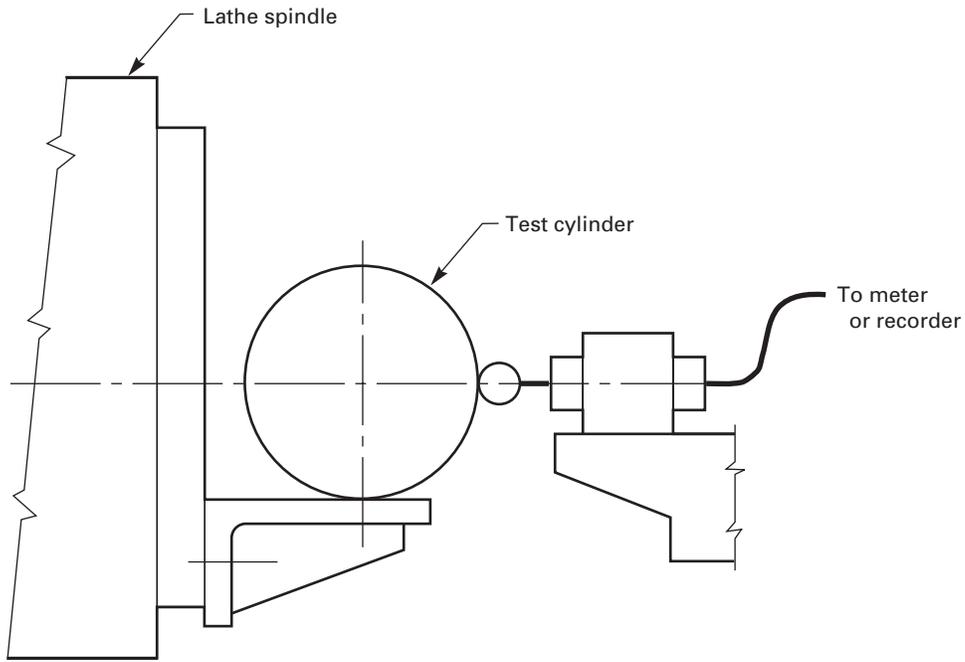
Setup for Straightedge Rotation on a Vertical Spindle Lathe for Measuring Z-Axis Parallelism to the C-Axis
